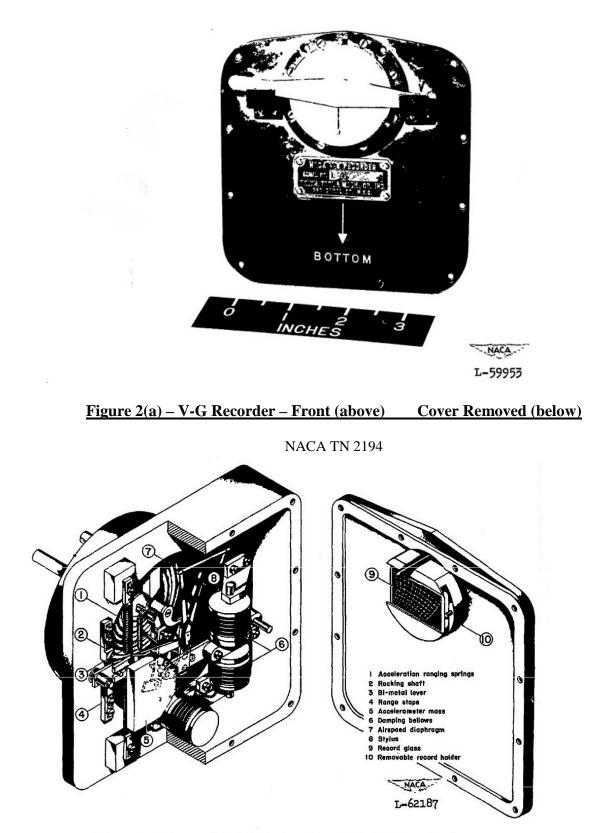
Cutaway pictorial drawing of mechanical linkage in the NACA oil-damped V-G recorder.
